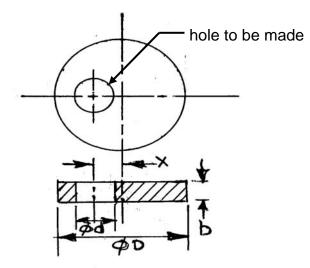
A through hole has to be drilled in a pre-machined mild steel disc.
